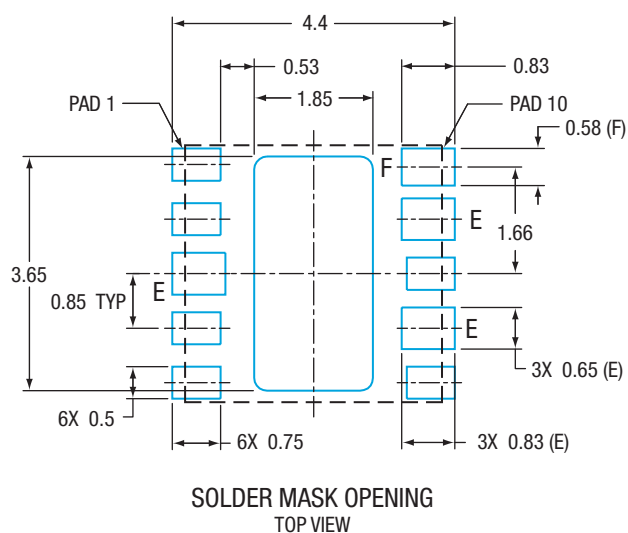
Phone PCB Layout Footprint for 4 mm x 4 mm, 10-Pin Package – CX77105 Specific
